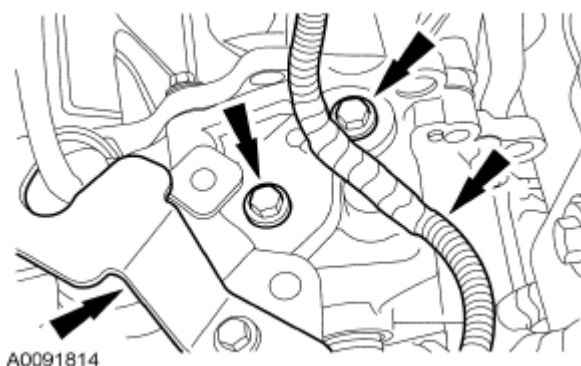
Locating Transaxle Control Cable, Bracket & Bolts
